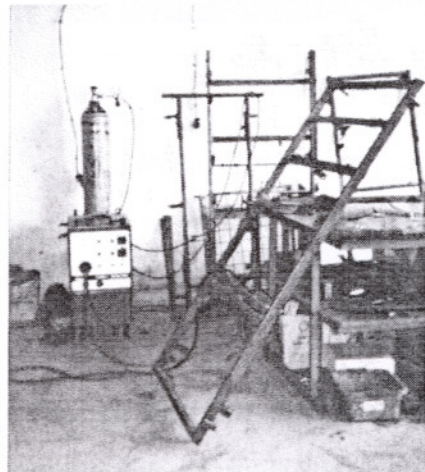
Jig fixture and inert gas weld. (Reha, 1999)
